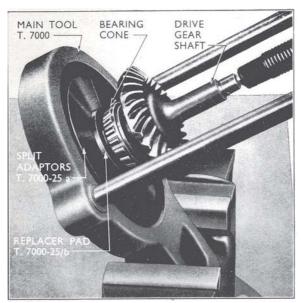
Replacing the Large Bearing Cone on the Drive Gear Shaft
